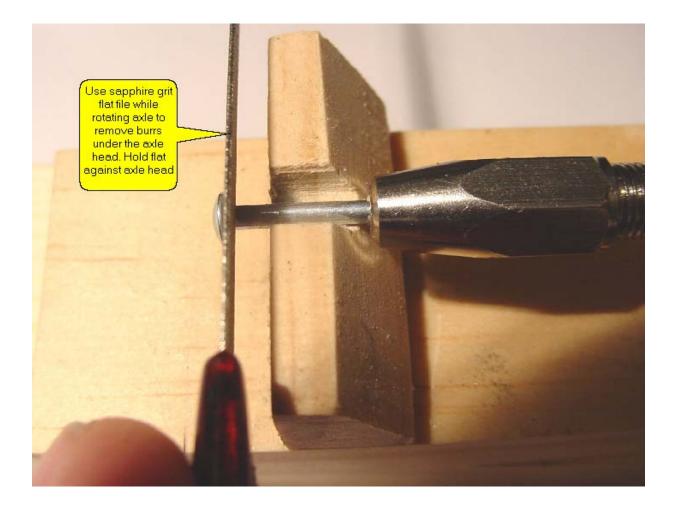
Magnified view of an axle in the swivel head pin vise placed on the polishing block while filing down the burrs underneath the axle head.
